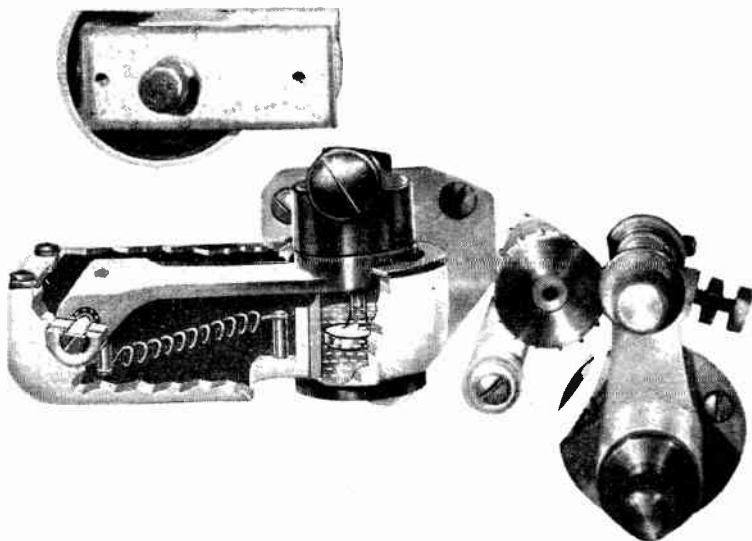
Close-up view of the film filtering mechanism. Essentially the device consists of a pivoted, fluid-damped lever arm which makes contact with the film loop between the sound sprocket and scanning through a ball bearing pad roller. It takes up any slack in the loop, however slight, and conversely responds when the loop tightens. This action results in the application of a precisely constant driving force to the scanning drum and hence, practically flutter-free operation. *Courtesy Western Electric Company.
